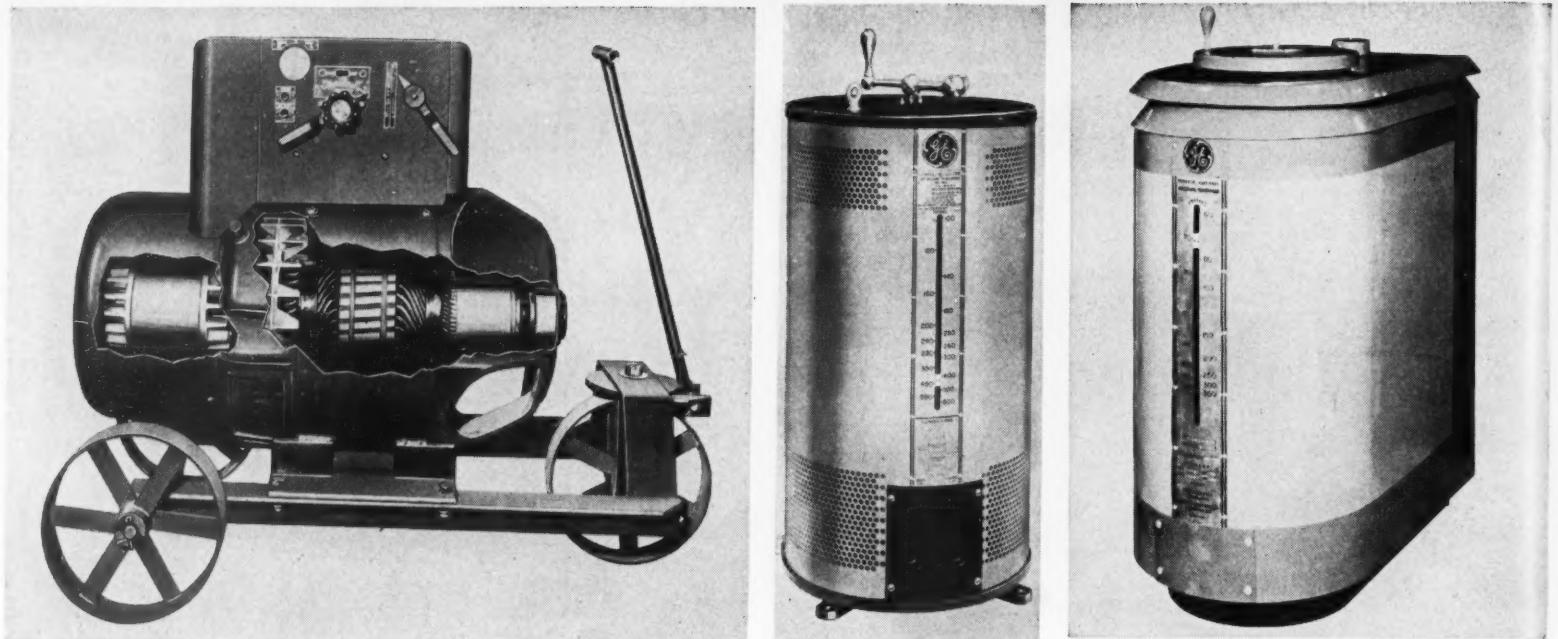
THREE COMMON TYPES of arc-welder: (a) left, single-operator, dc. portable motor-generator unit; (b) center, arc welding transformer of indoor ac. type; (c) right, outdoor type of ac. welding transformer.
